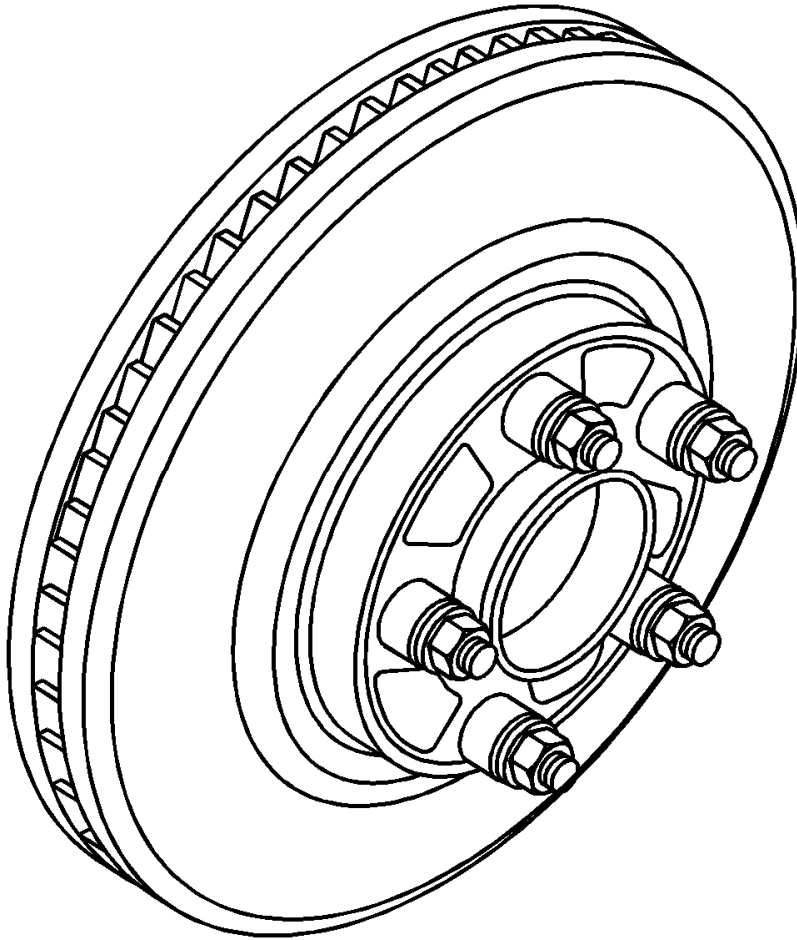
Conical Brake Rotor Washers & Lug Nuts
